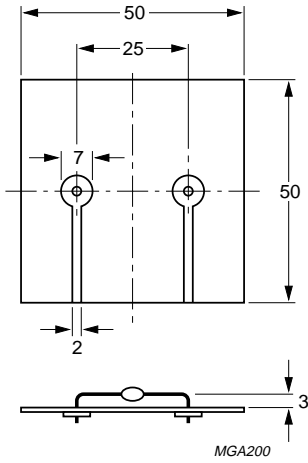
Leaded device mounted on printed-circuit board 50 × 50 mm.
